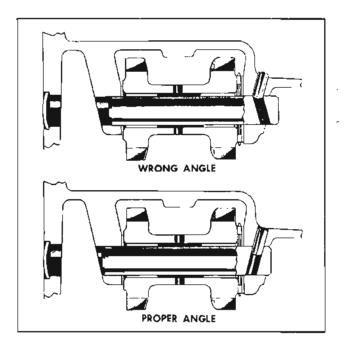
Reverse Idler Gear Shaft and Lock Pin
